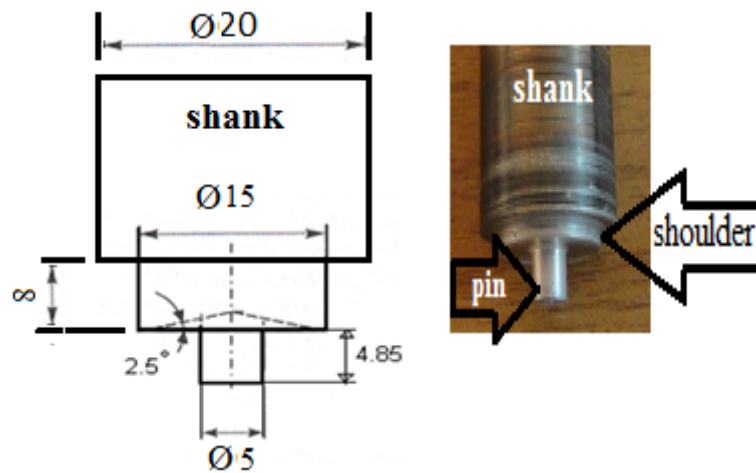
HSS tool of FSW. (The dimensions of tool in mm)
